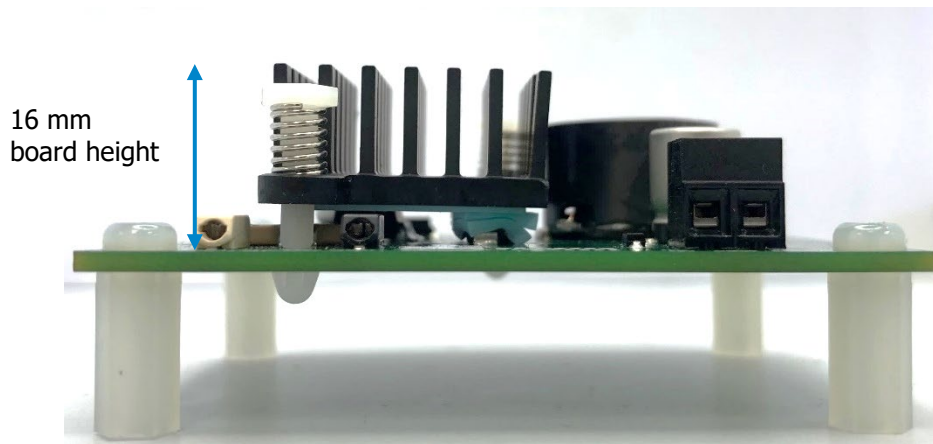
Populated Circuit Board with Heat Sink - Side.
